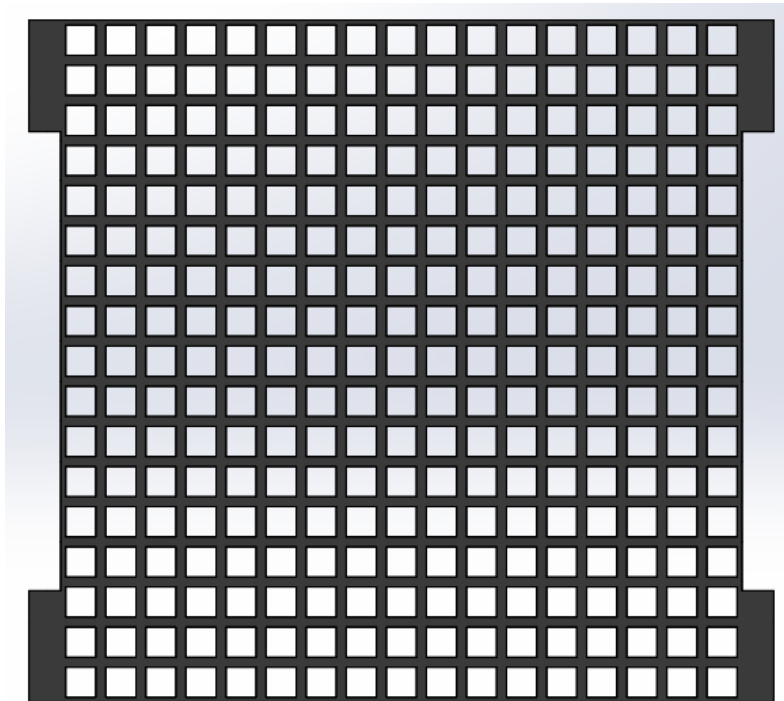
Top view of the bracket that holds the stainless steel tubes in place while the fuel rods are placed into the tubes
